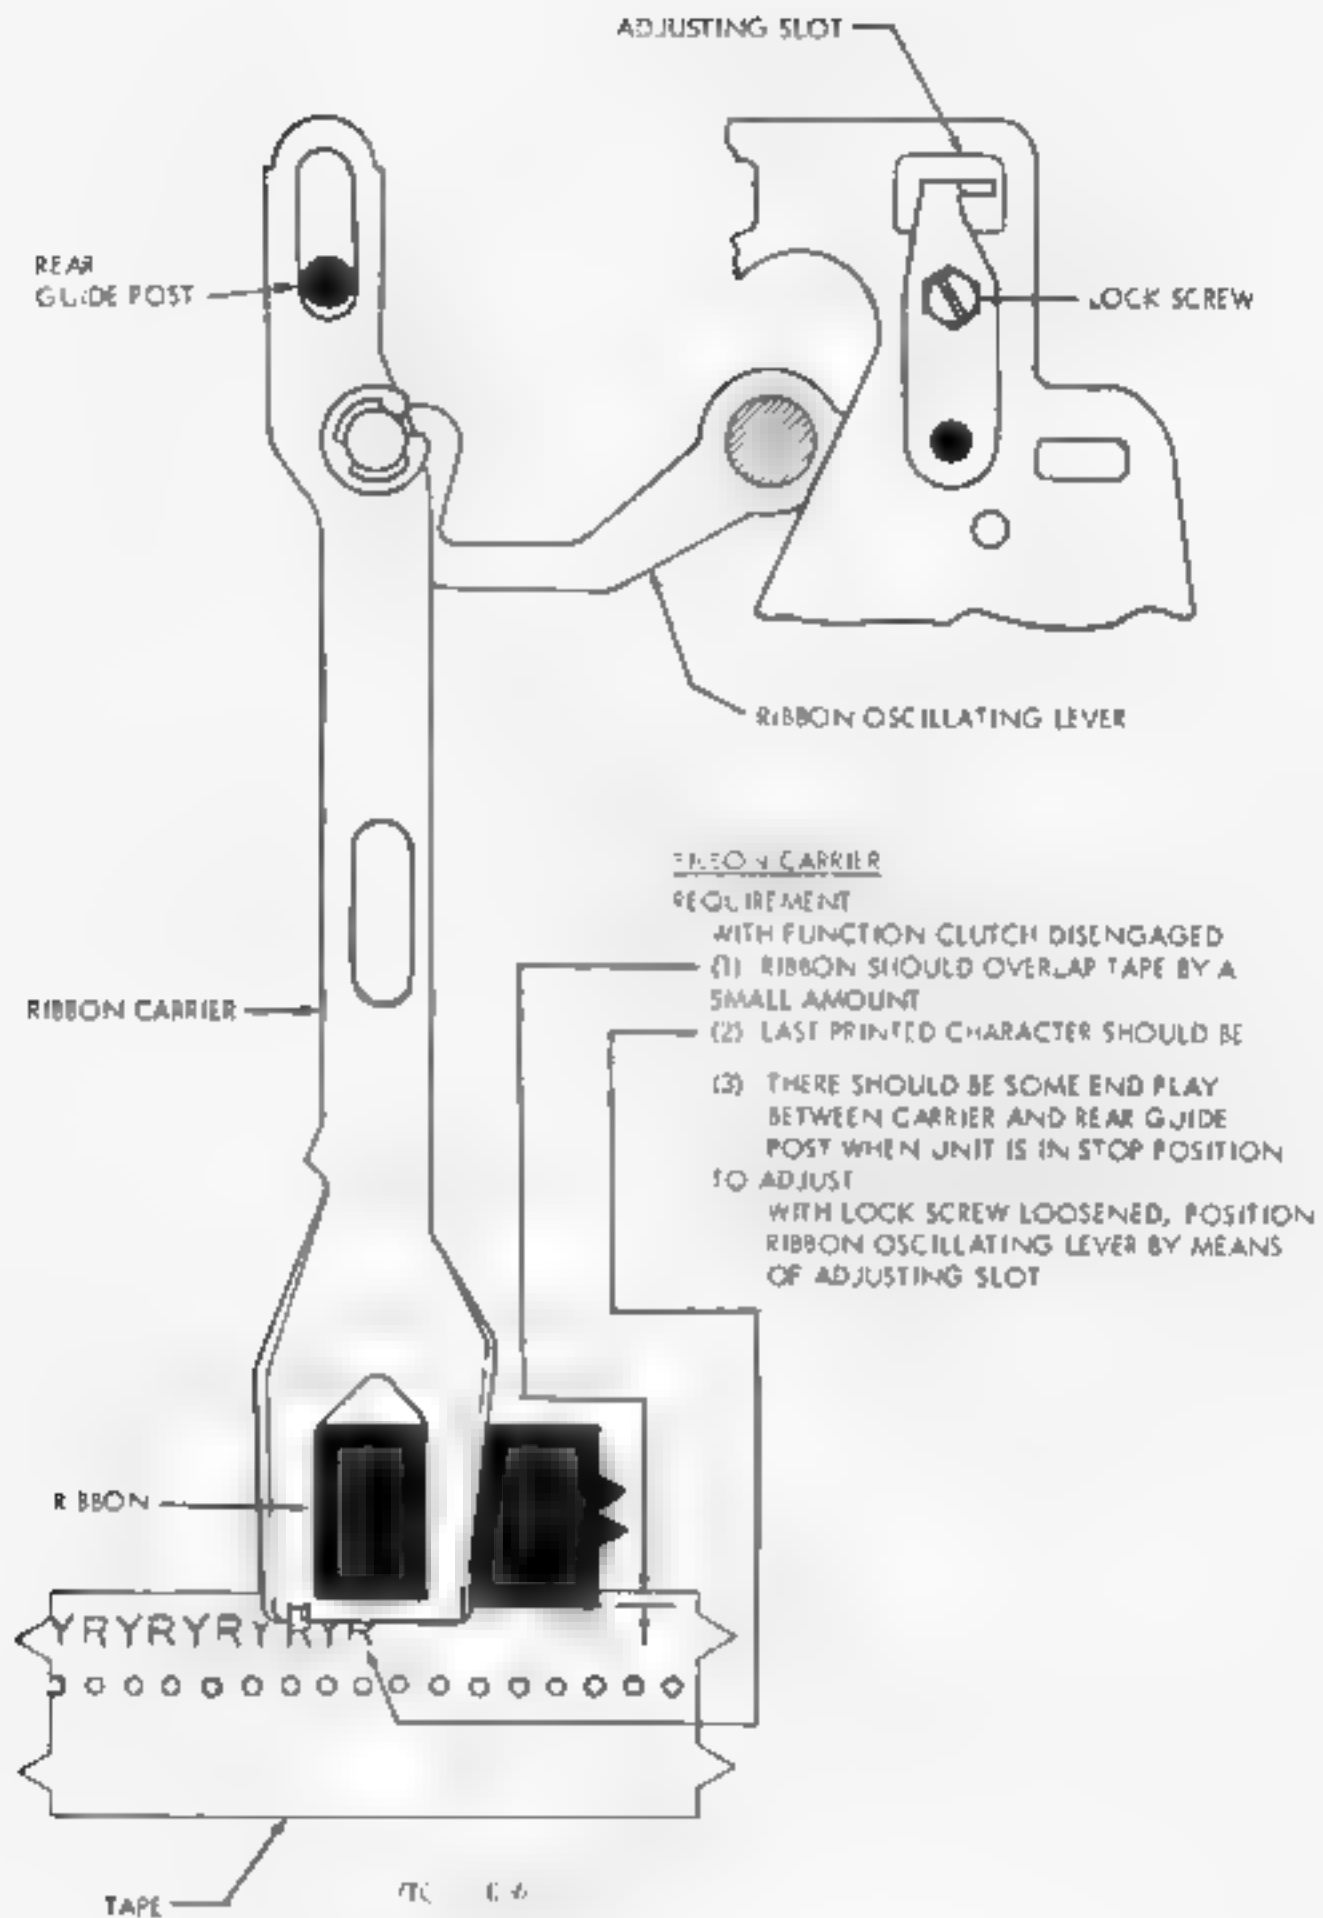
RIBBON OSCILLATING MECHANISM FOR CHADLESS TAPE
